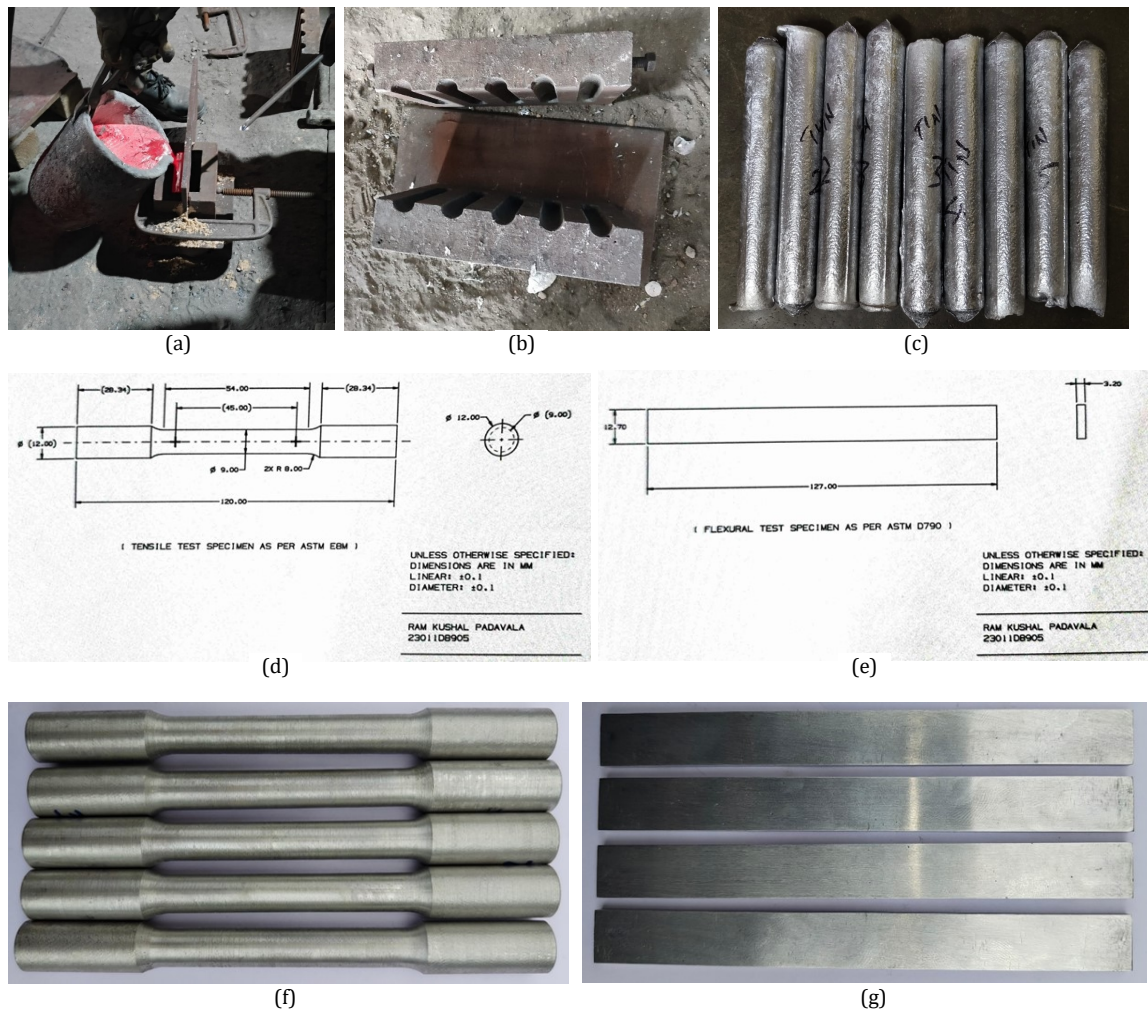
(a) Pouring of Molten metal into Die, (b) Casting Die (Ø20 x 150), (c) Solidified Cast specimens (Ø20 x 150), (d) *Tensile test specimen as per ASTM E8M*, (e) *Flexural test specimen as per ASTM D790*, (f) *Machined Tensile Test Specimens*, (g) *Machined Flexural Test Specimens (also used for Hardness Test)*.
